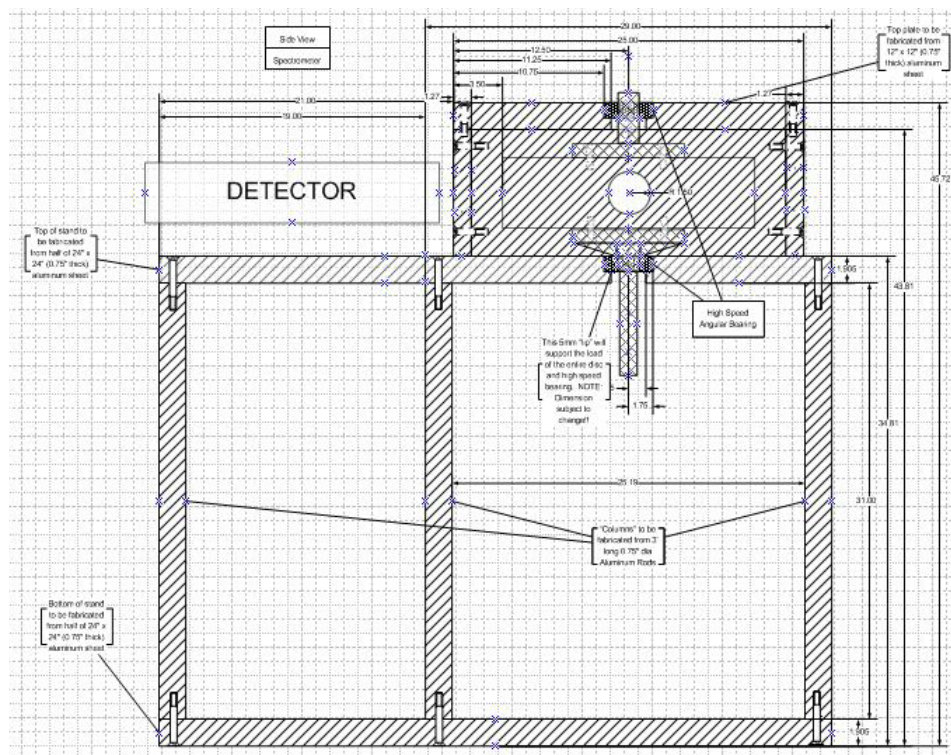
Disc chopper schematic - (Disc Housing Side View)
